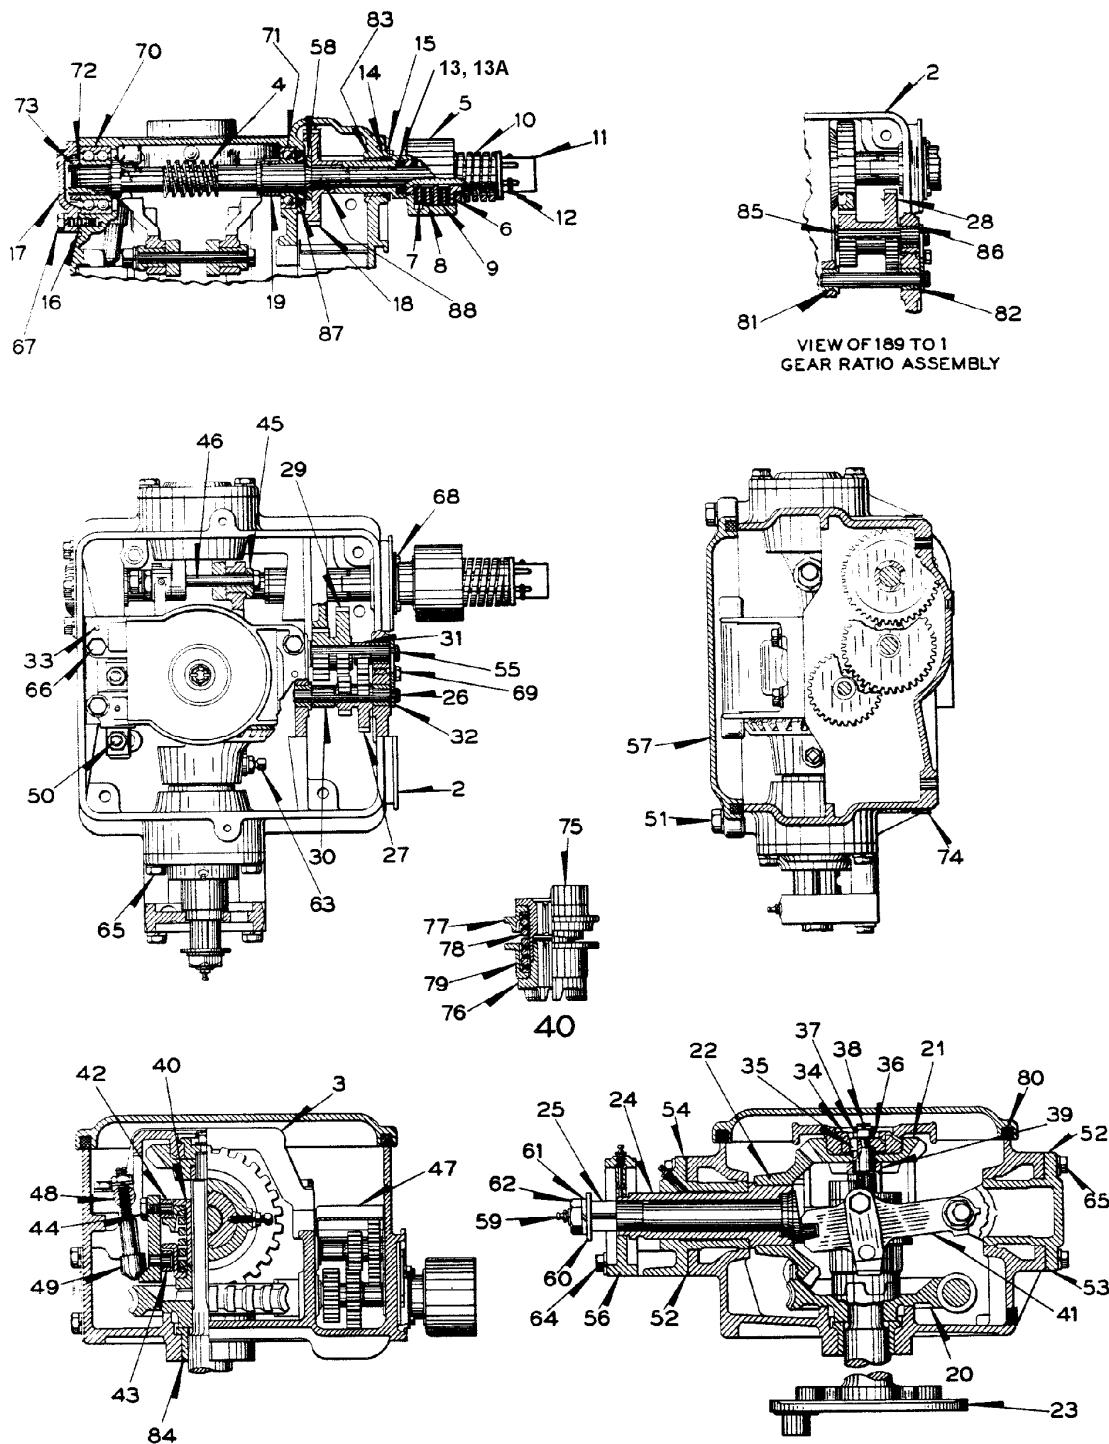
M-23A and M-23B Gear Box Parts Location
